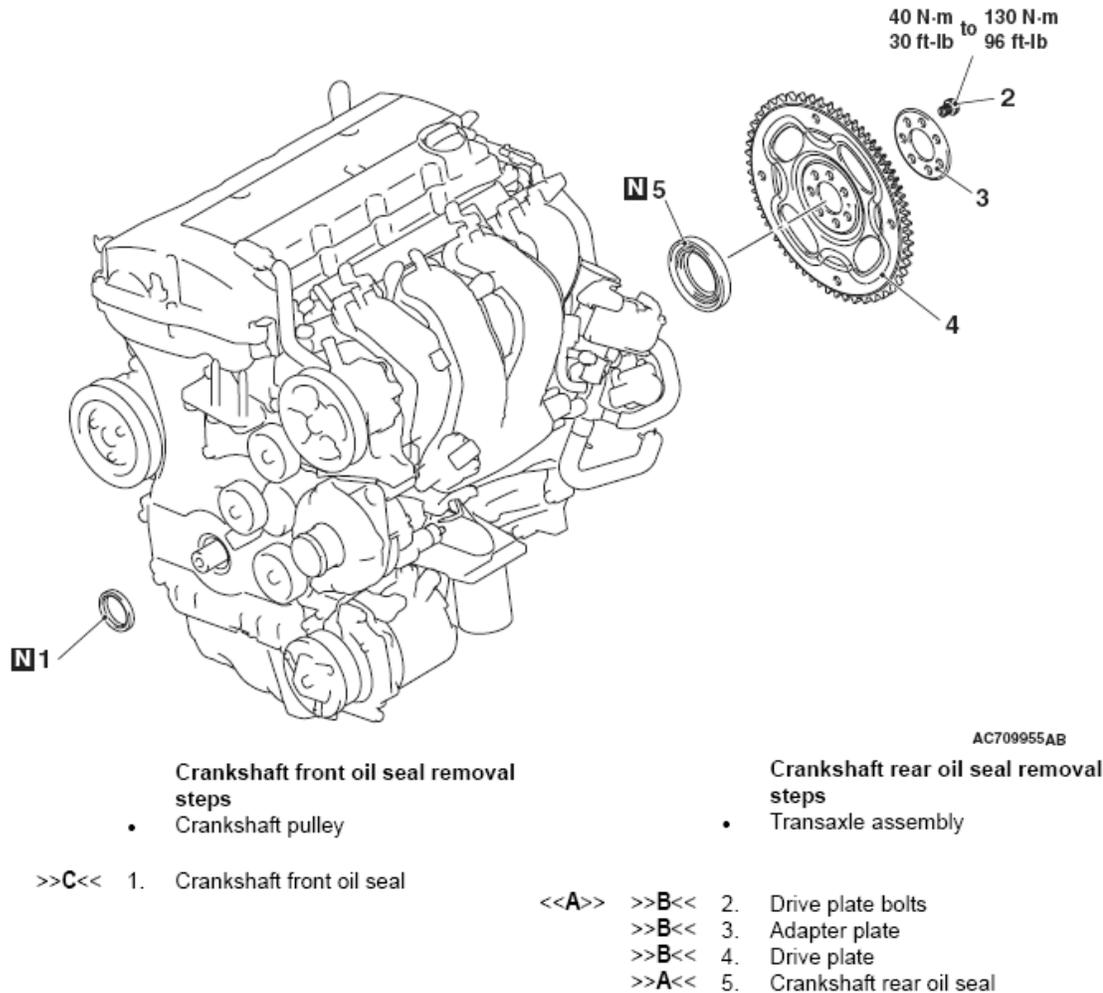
Identifying Crankshaft Oil Seal With Torque Specifications
